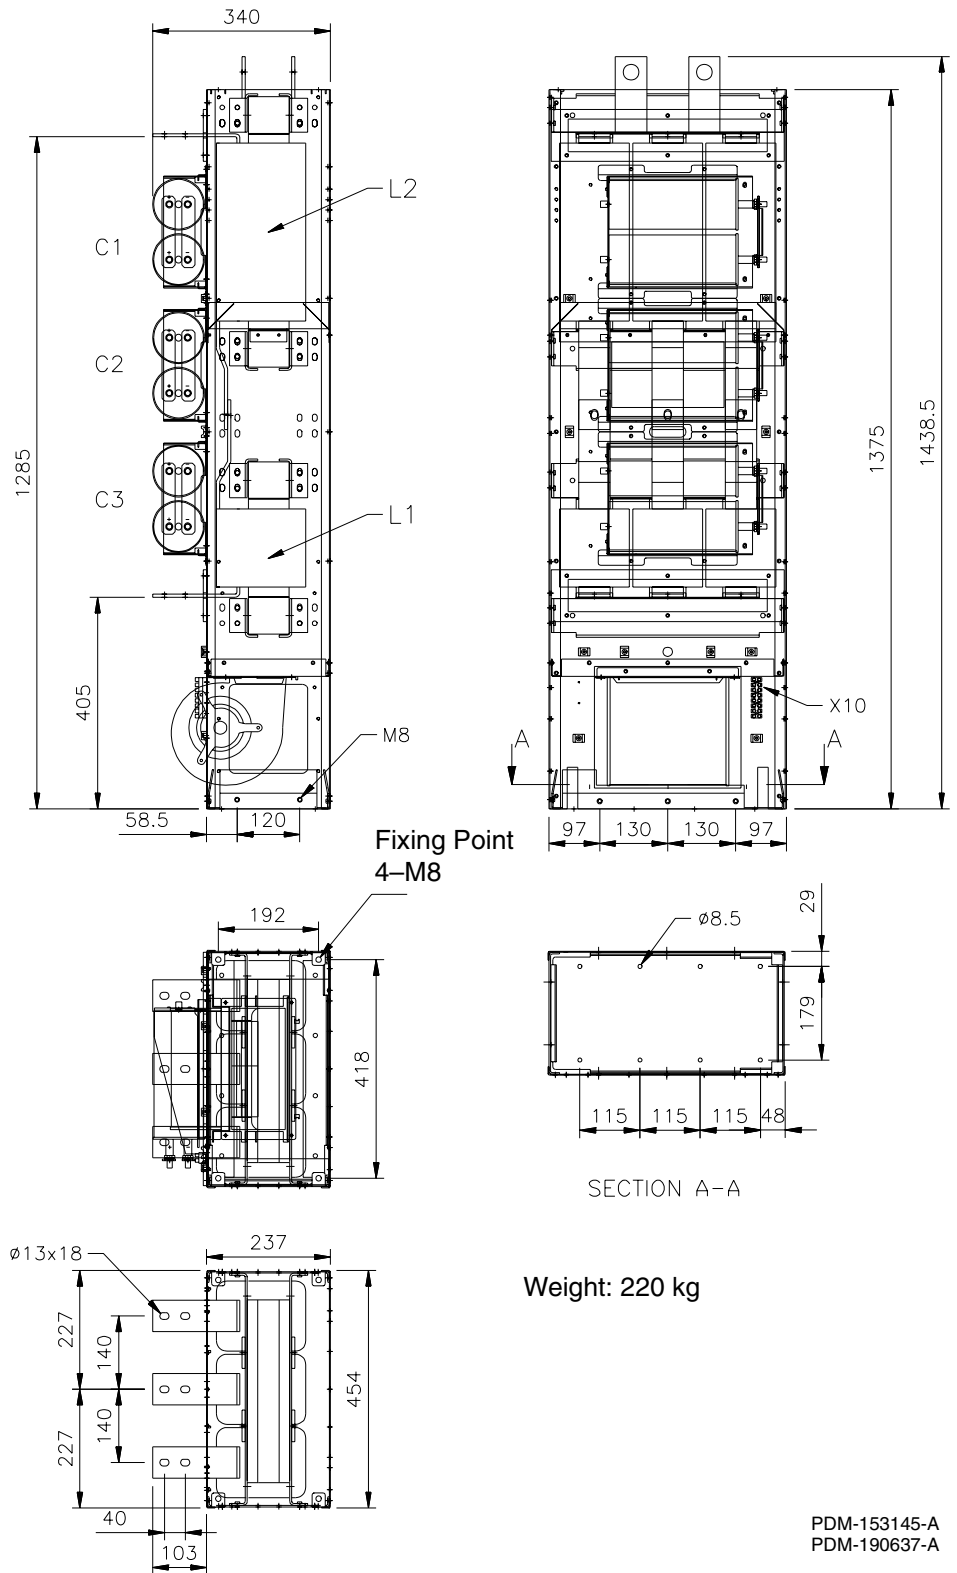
ISU_LCL_6R11 dimensions, fixing points and connectors.
